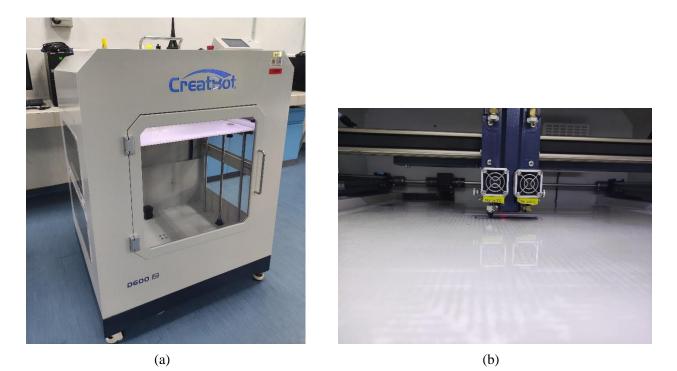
(a) CreatBot D600 pro 3D printer (b) Image of 3D printing process
